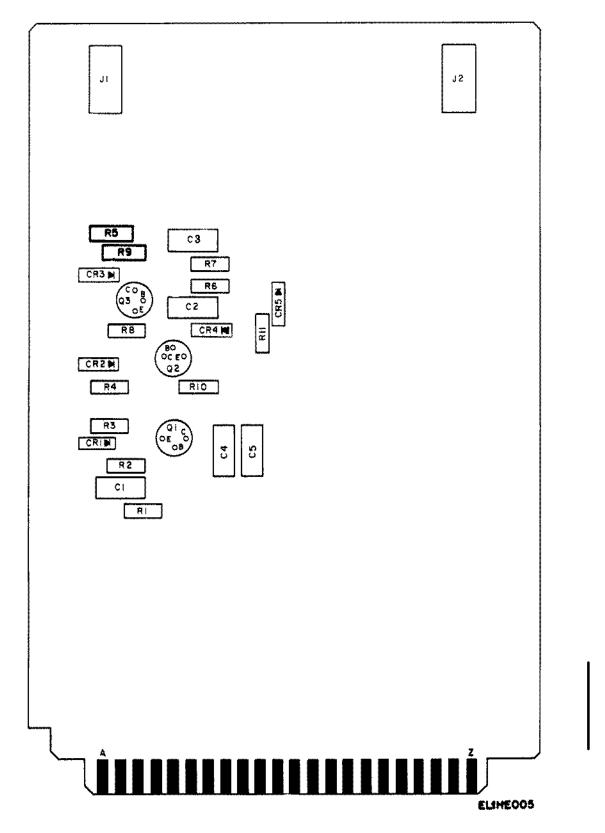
Printed-circuit card assembly A23A2 through A29A2 (PC 80034180), component location diagram.
